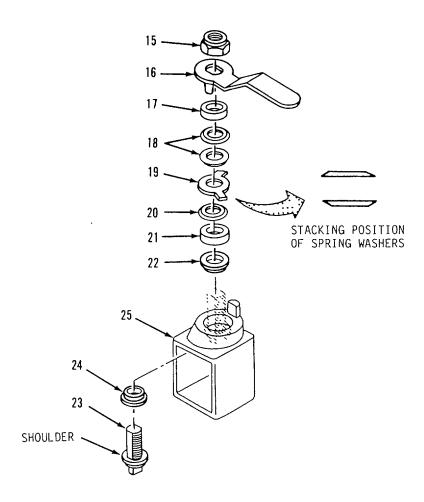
Quick Acting Valve Repair (Sheet 2 of 2).
